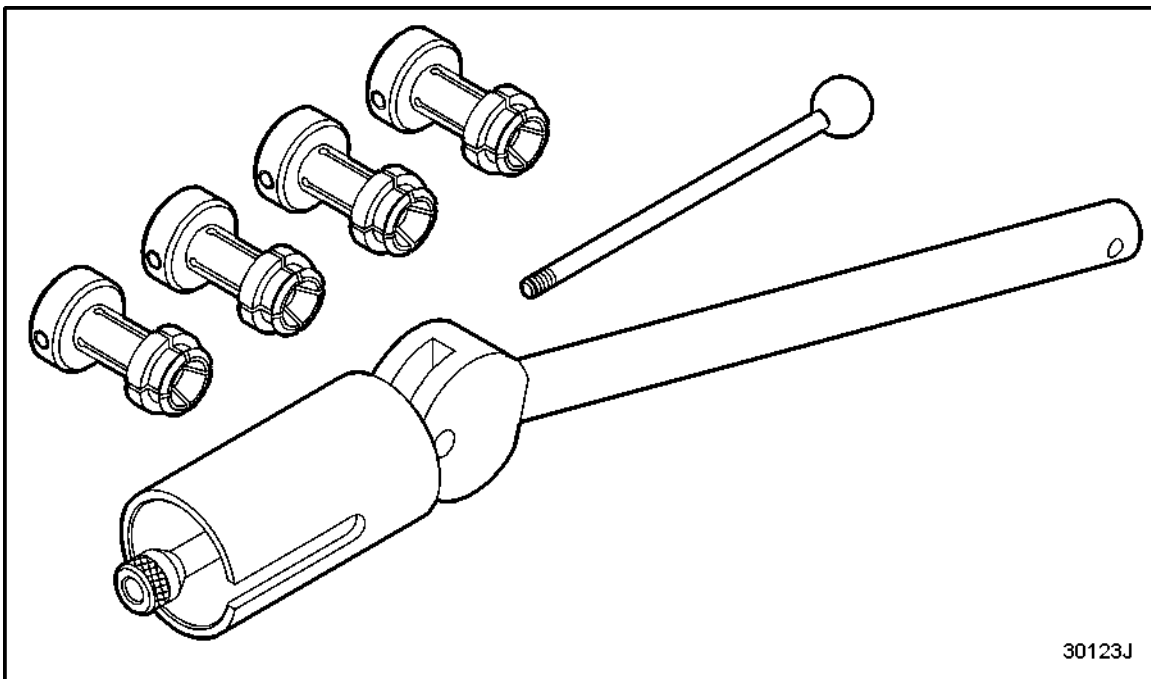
Valve Seat Insert Remover Set, J 23479-E
